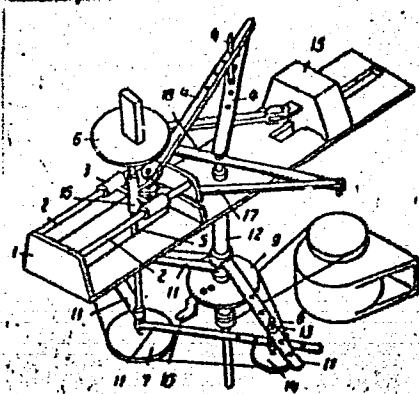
1--frame; 2--guides; 3--sleeves; 4--crankshaft connecting rod mechanism; 5--table shaft; 6--table for devices to be tested; 7--sprocket; 8--chain drive; 9--sprocket; 10--base of the unit; 11--levers; 12--sleeve of the frame; 13--intermediate axle; 14--sprockets; 15--weight; 16--shaft sleeve; 17--levers; 18--rocker
